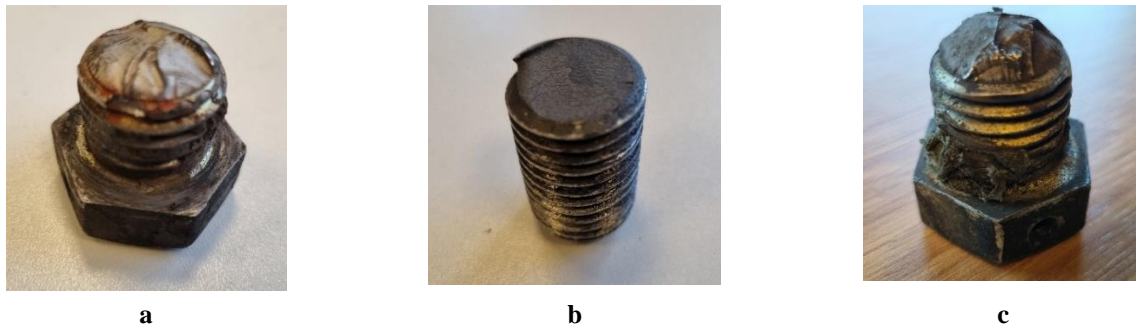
Examples of rubber cord coupling bolt fractures: Sample 1; (a) fatigue fracture due to cracking;) Sample 2; (b) brittle fracture) Sample 3 (c) fatigue fracture due to crack).
